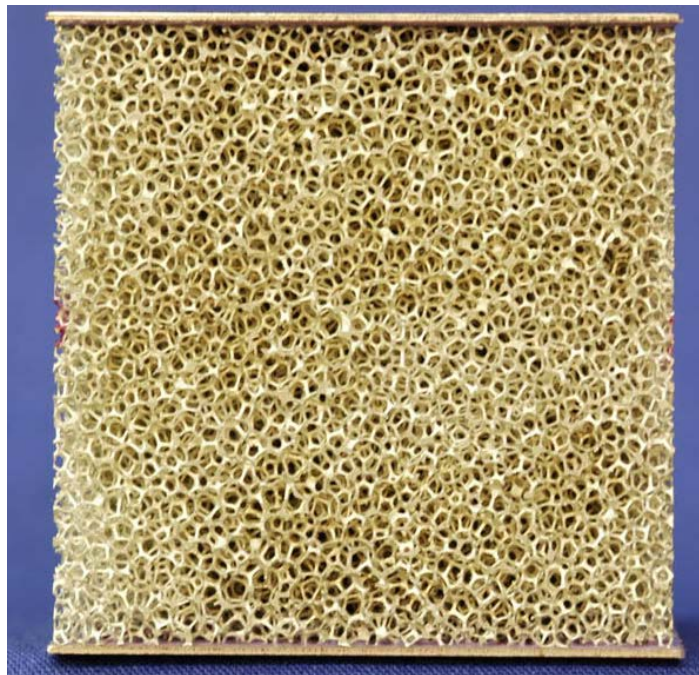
Photograph of DUOCEL aluminium foam manufactured using mould casting (Jang & Kyriakides 2009).
